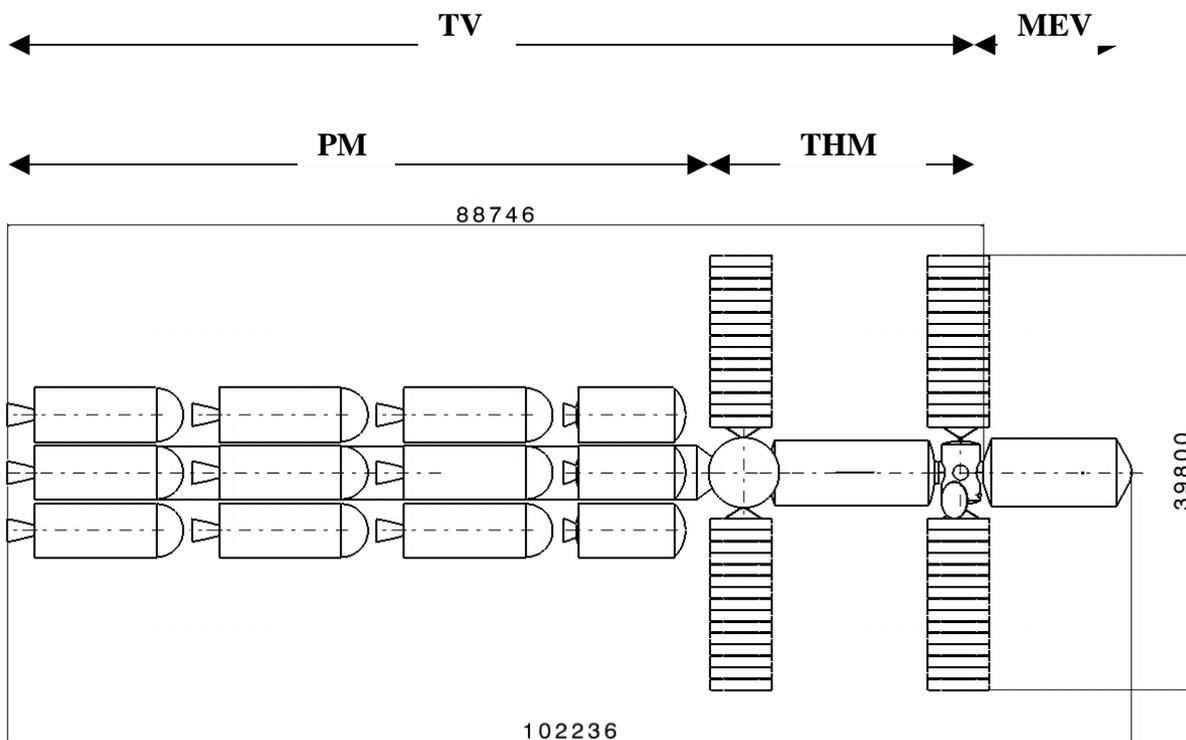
Global dimensions complete vehicle top view (dimensions in mm)
